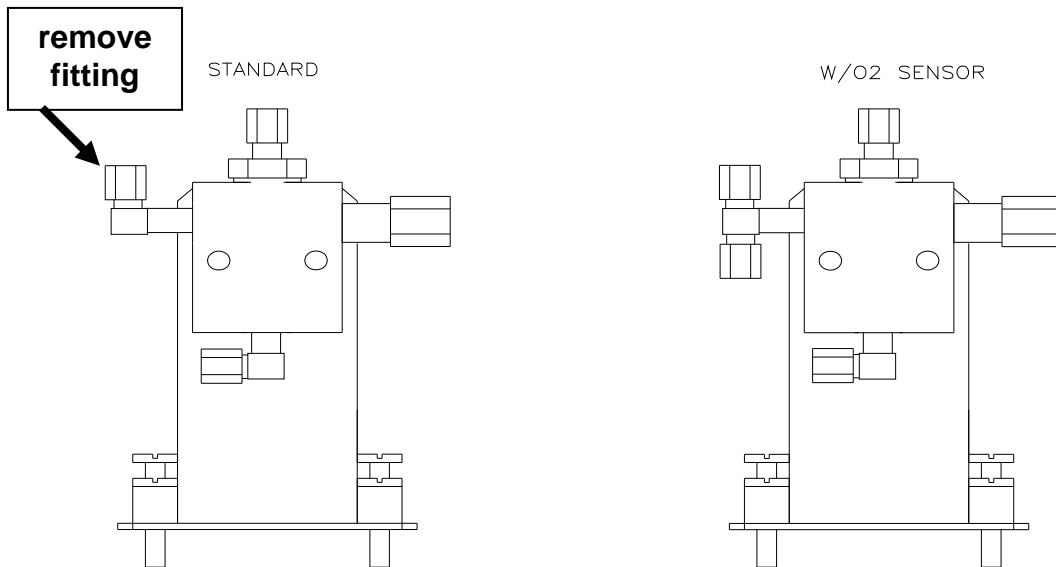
SHOWS THE BYPASS MANIFOLD BEFORE AND AFTER OXYGEN OPTION FITTING CONFIGURATIONS.
